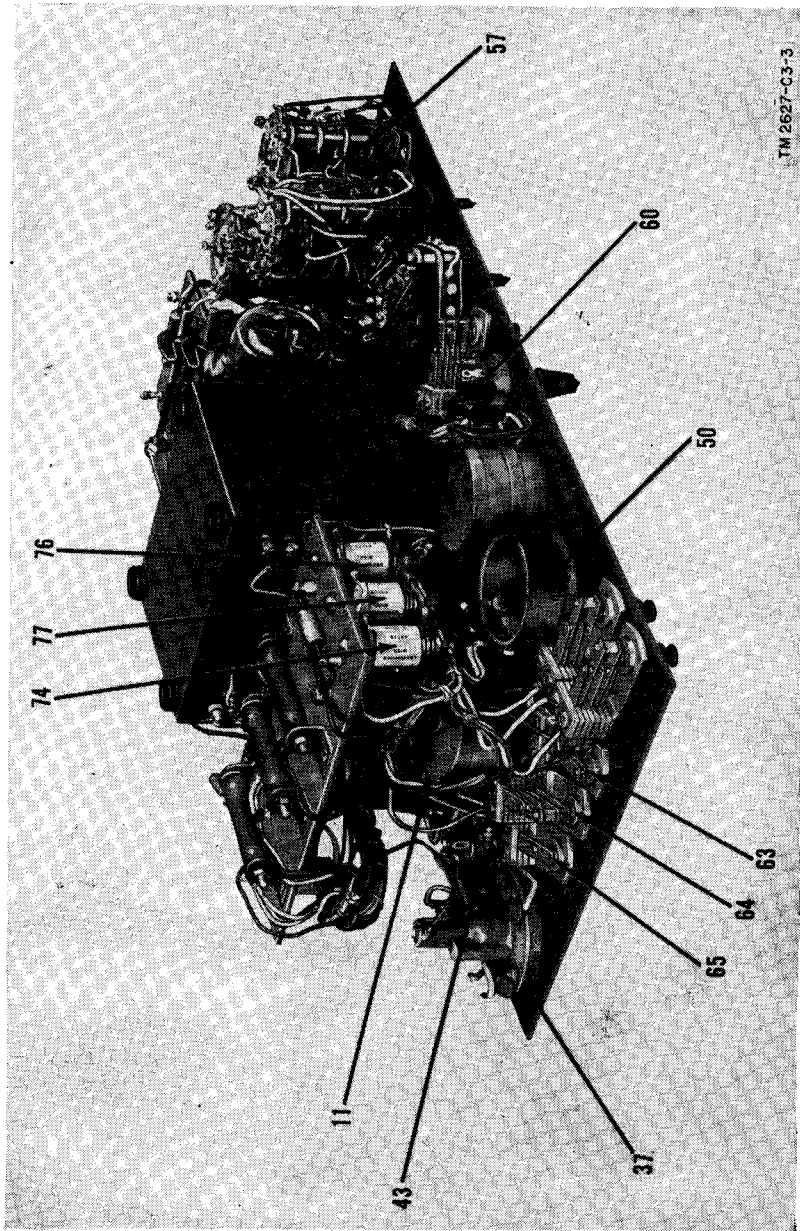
(Added) Bottom right view of chassis of Tube Tester I-177-B.
